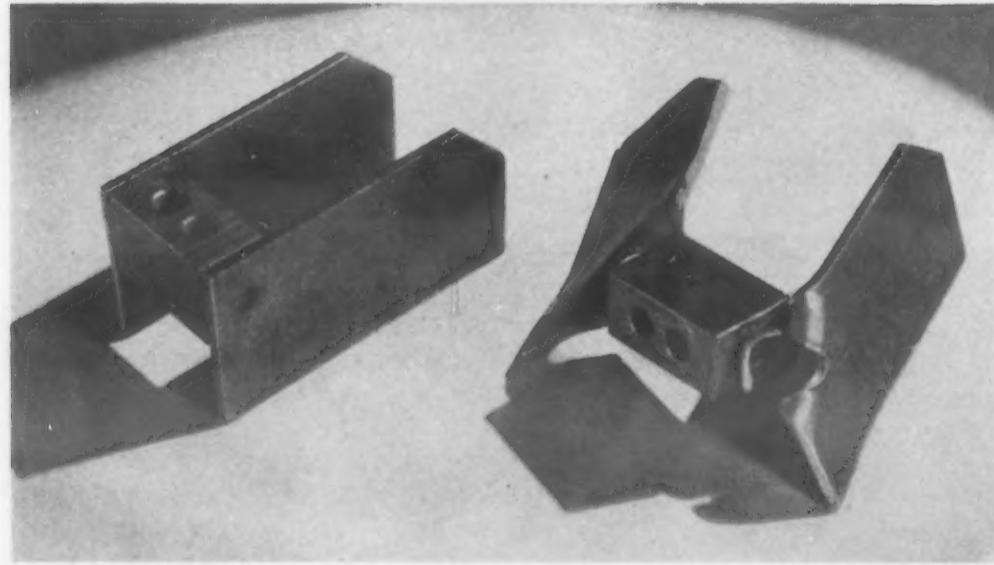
A costly machining job is eliminated on this unit by joining three simple shapes through resistance welding.
